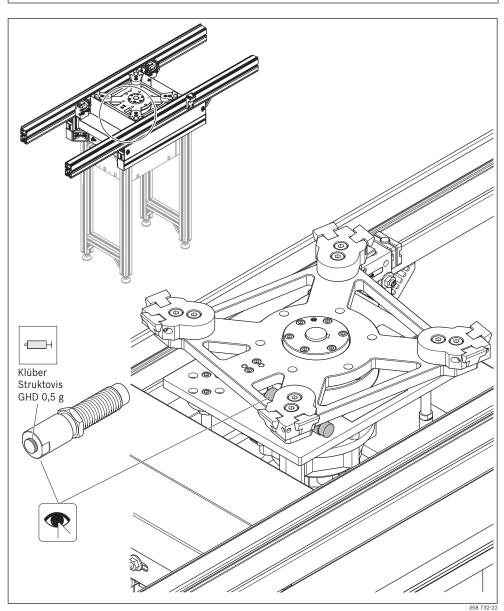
Lubricating the load adapter of dampers (here size 2 for WT 2, WT 2/F)
